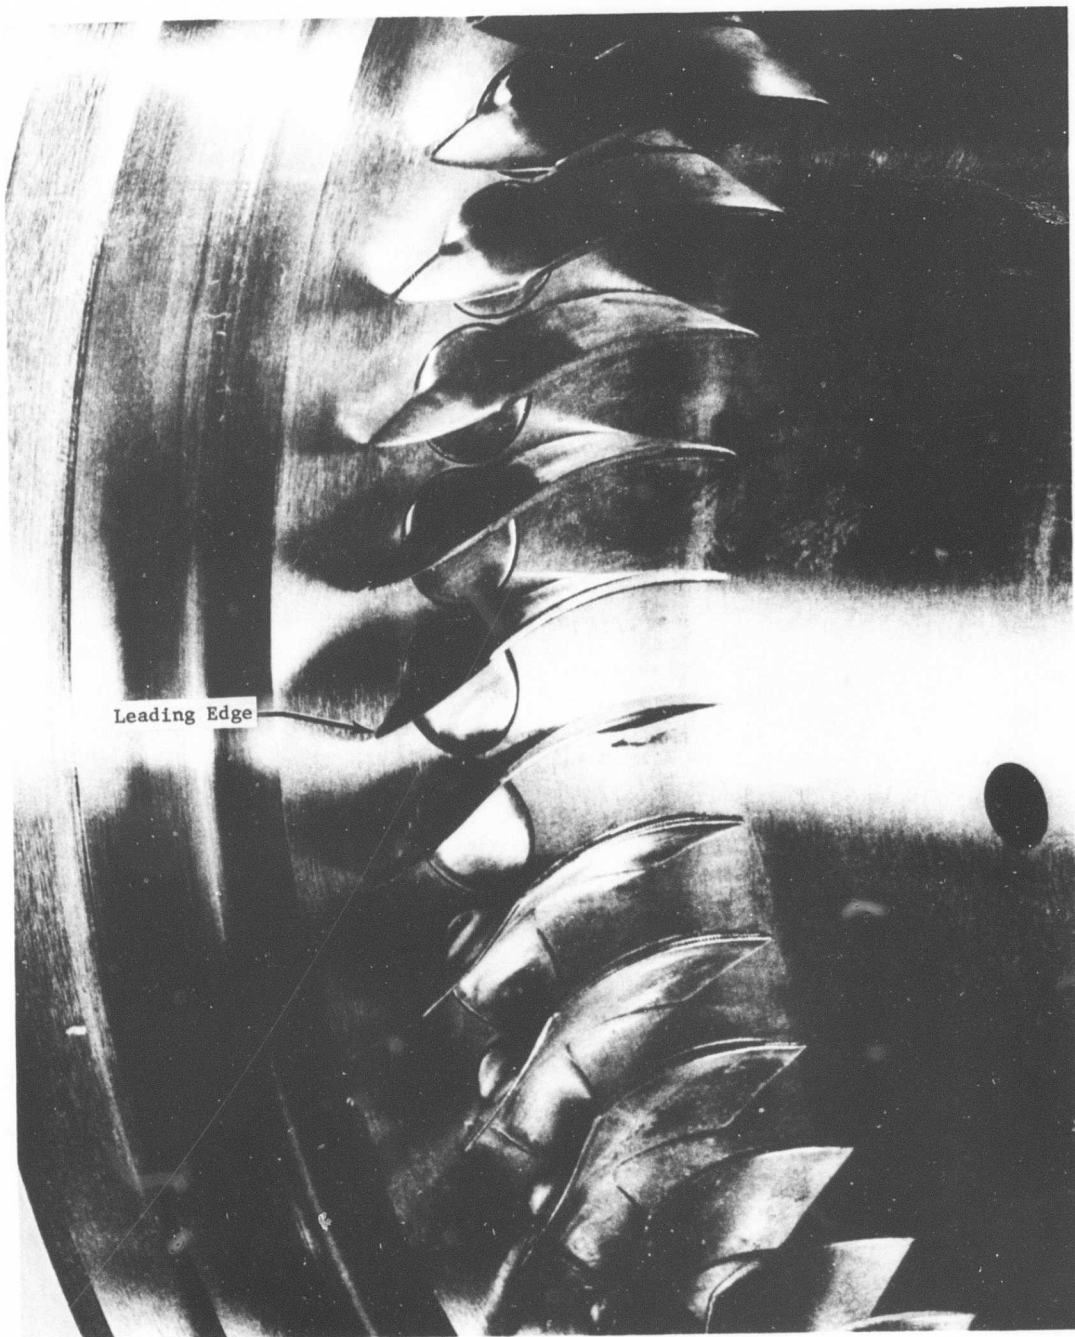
Redesigned Exit Stator and Outer Housing Assembly,
